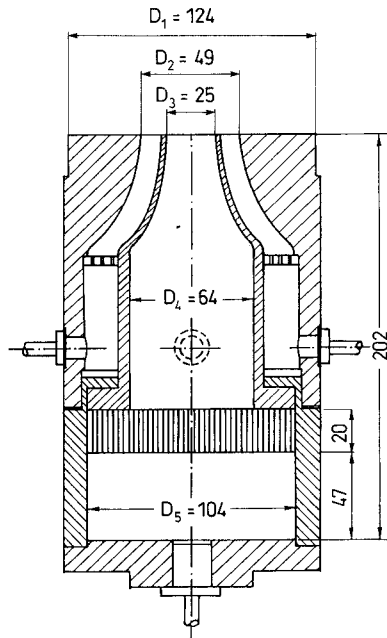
Sketch of burner type I with detailed dimensions in mm
